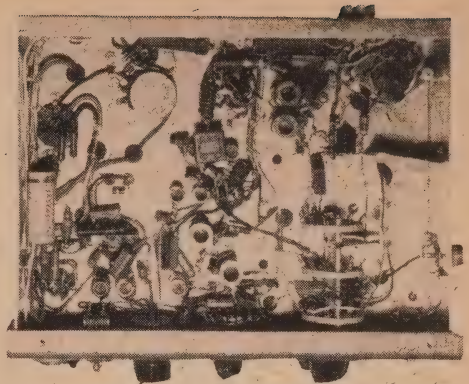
Under-chassis placement of parts within the mobile SSB transmitter.
